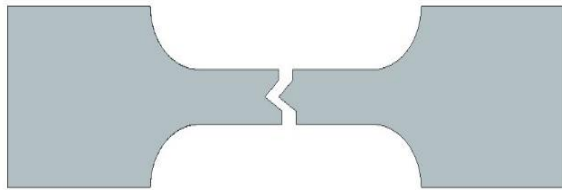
Expected post failure condition of designed miniature tensile specimen showing the failure in the gage section.
